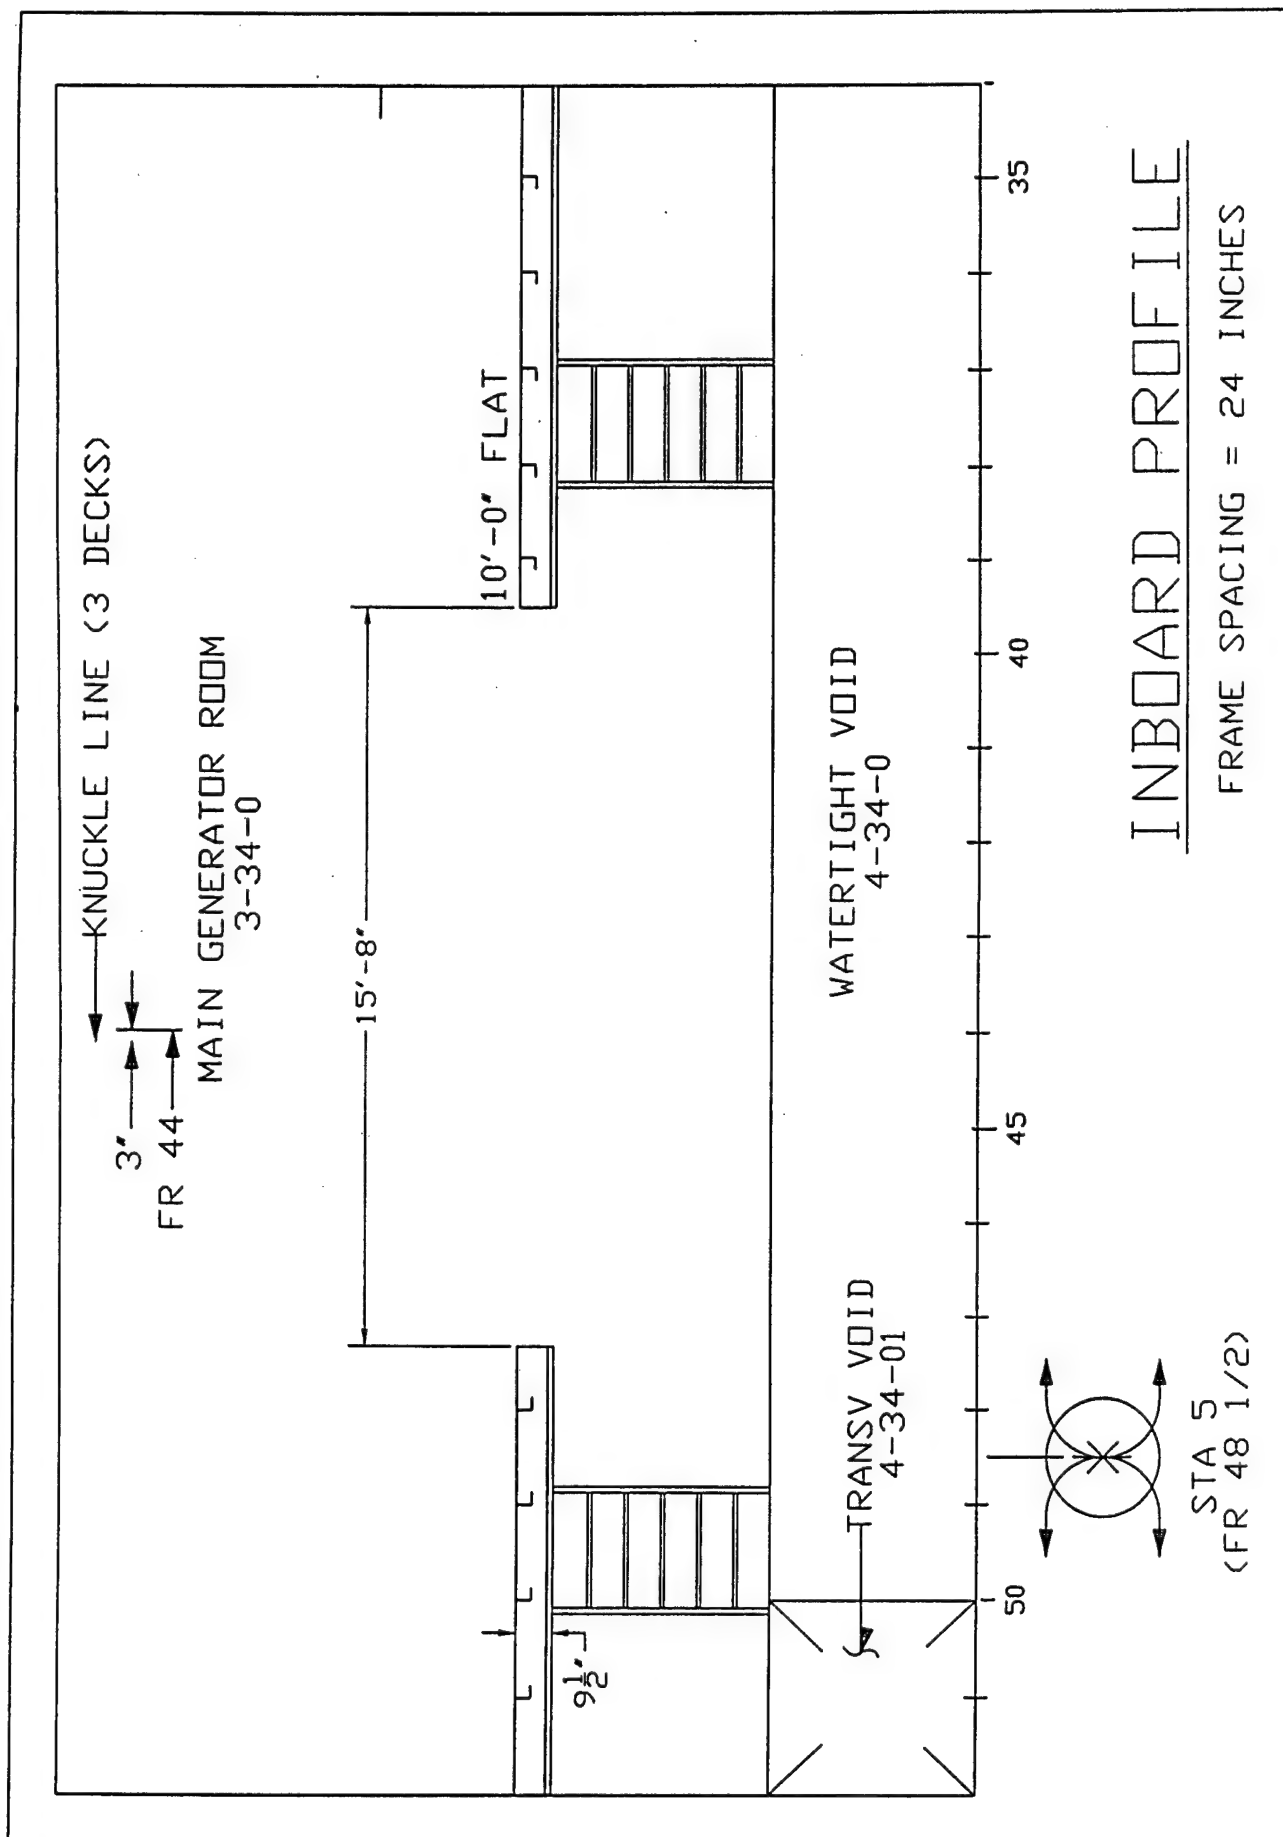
ELEVATION VIEW AFTER REMOVAL OF DIESEL ENGINES AND BEDPLATES
